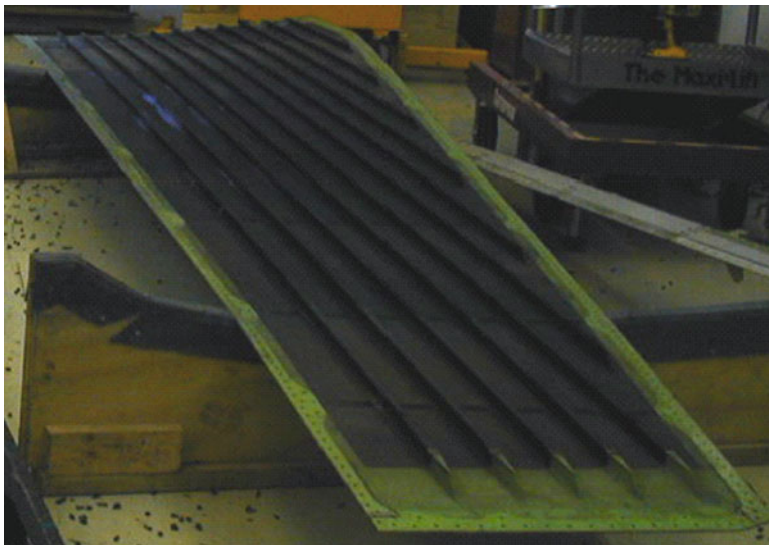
B-737 R/H composite stabilizer lower skin, after disassembly
